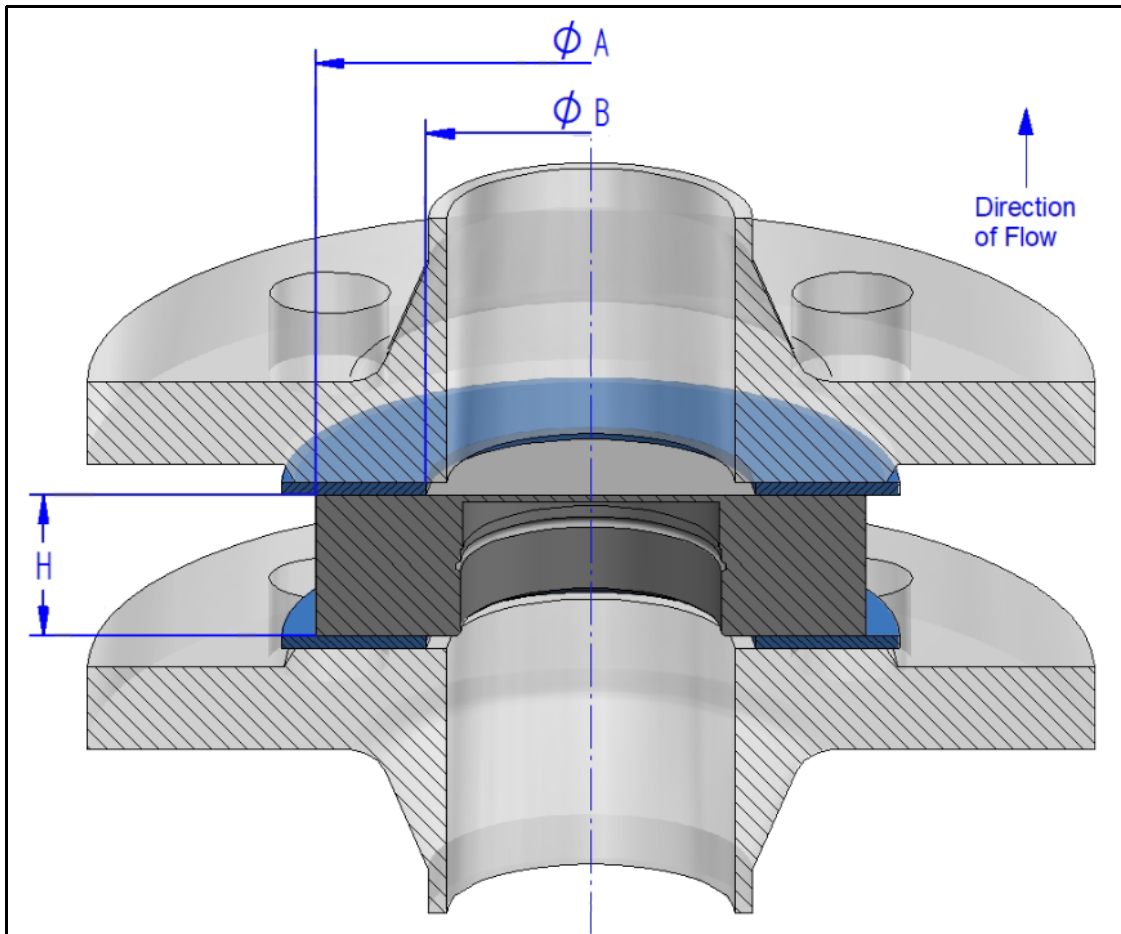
Dimensions GRX[®]-UK for installation between flanges
